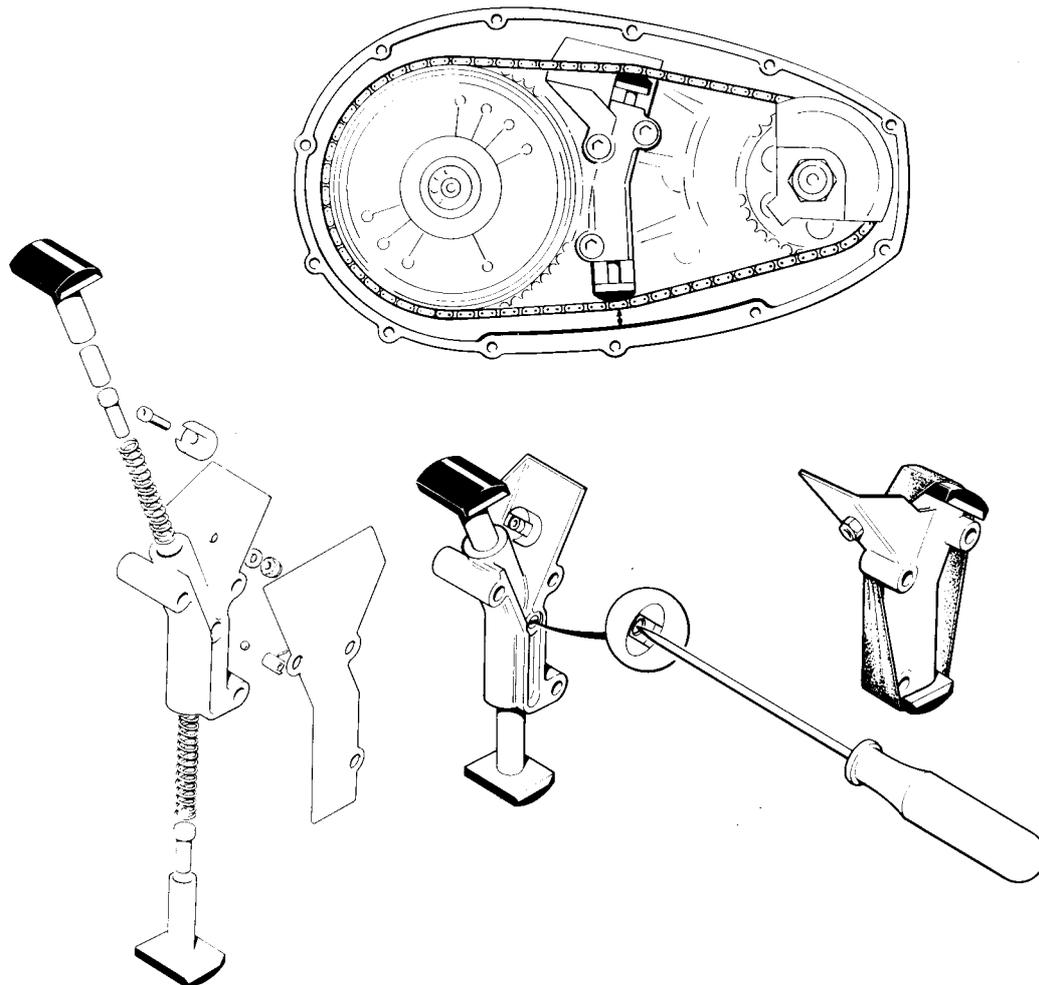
Removing and Replacing the Primary Chain Tensioner
